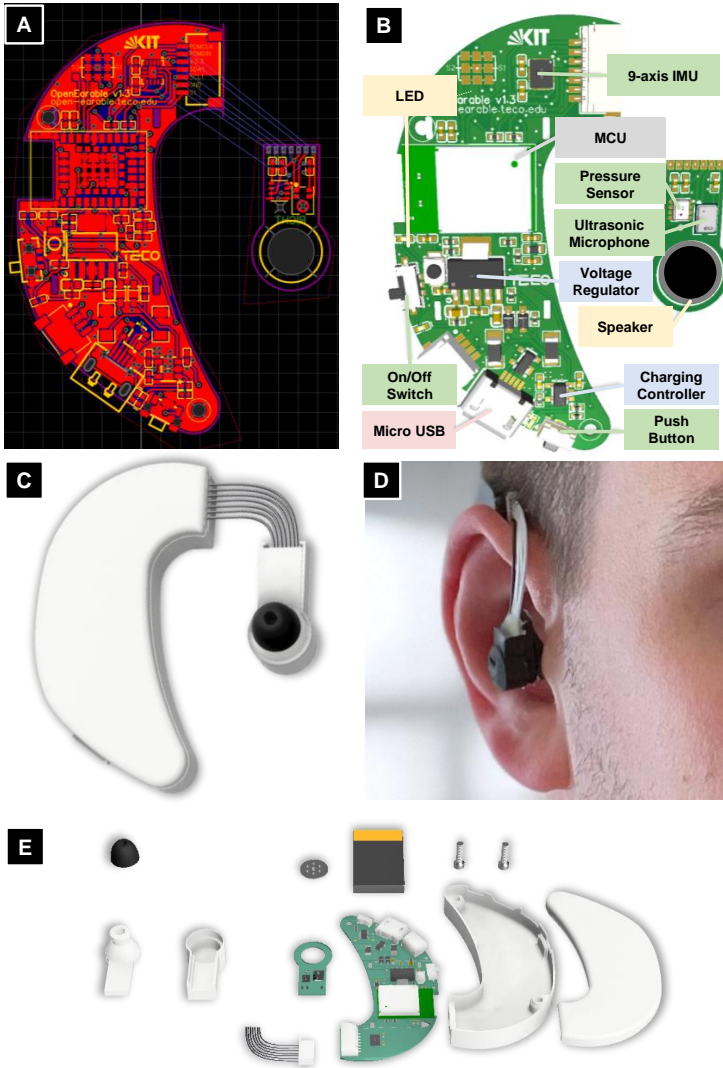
(A) PCB layout of OpenEarable; (B) 3D-rendering of the PCB and components; (C) assembled device; (D) a person wearing the device; (E) disassembled hardware components.
